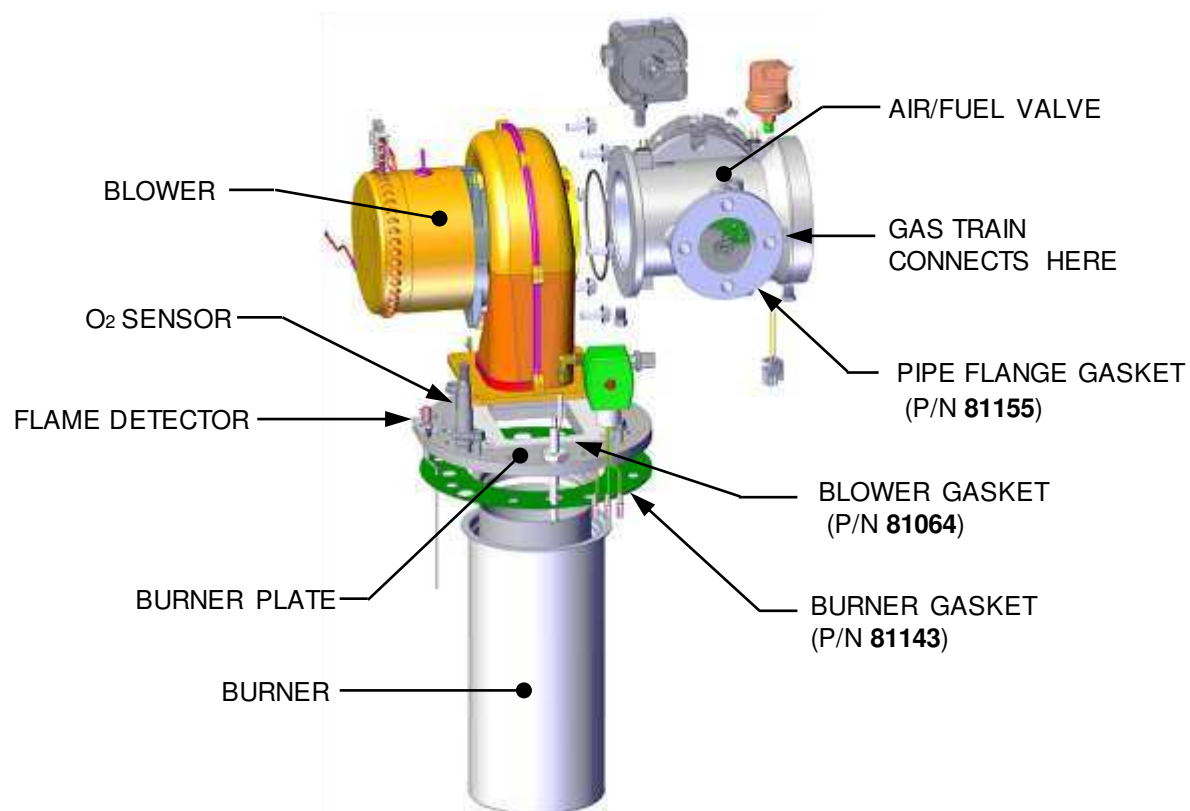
Burner Assembly Exploded View – BMK750/1000
